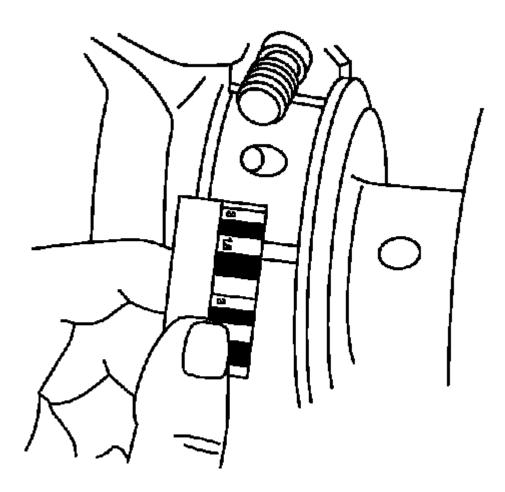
Measuring Gaging Plastic Courtesy of GENERAL MOTORS CORP.
